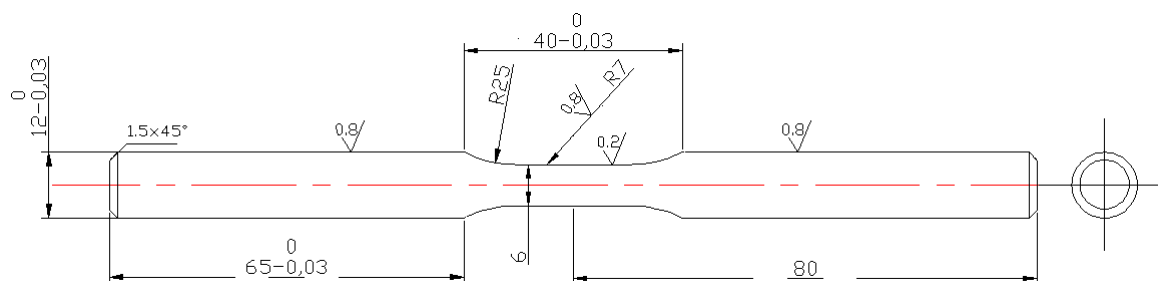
Dimensions of the samples used for rotating bending fatigue tests.
